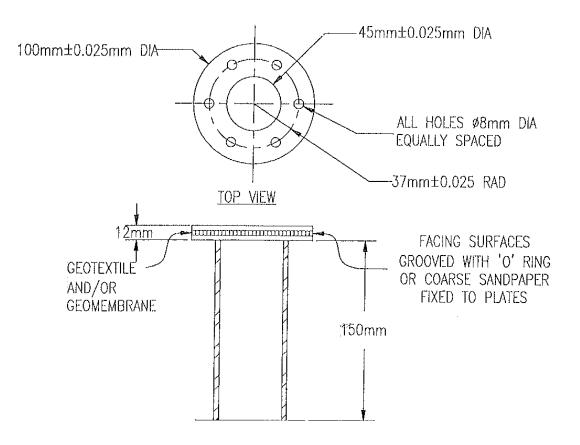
TEST FIXTURE DETAIL (NOT TO SCALE)
